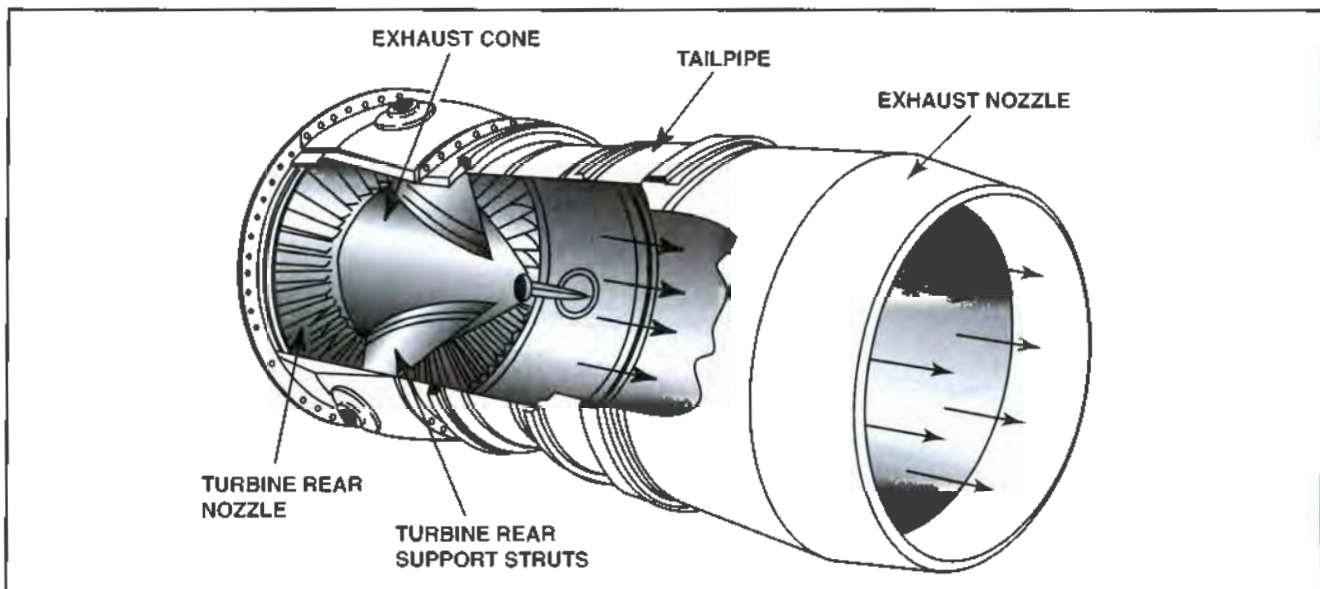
A typical exhaust section has an exhaust cone, tailpipe, and exhaust nozzle. The exhaust cone is considered the rear-most component of a typical gas turbine engine. The tailpipe and exhaust nozzle are usually classified as airframe components.
